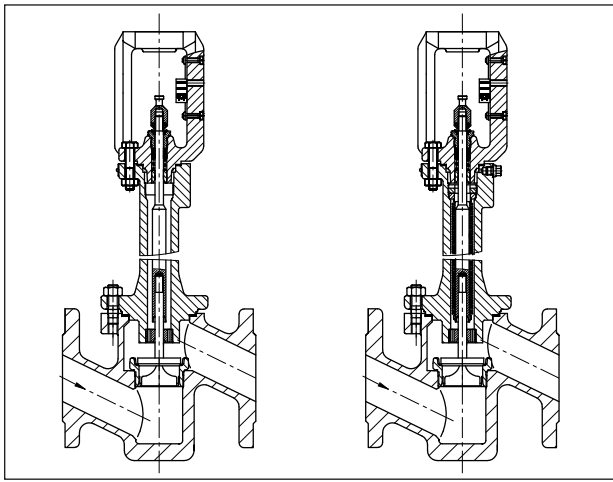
Type 3241 Valve · DN 15 to 80 · Forged steel version
